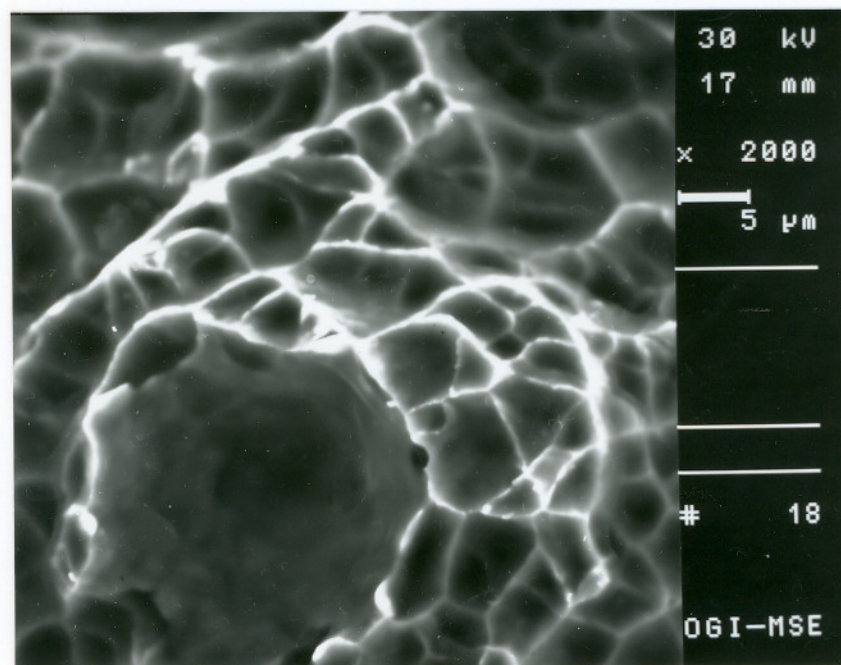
SEM fractograph of the CVN samples of GMA weld metal of Alloy 11 deposited at 2.5 kJ/mm (64 kJ/in.) heat input with Ar-5%CO₂ shielding gas on HSLA-100 base plate, tested at -18°C (0°F).
